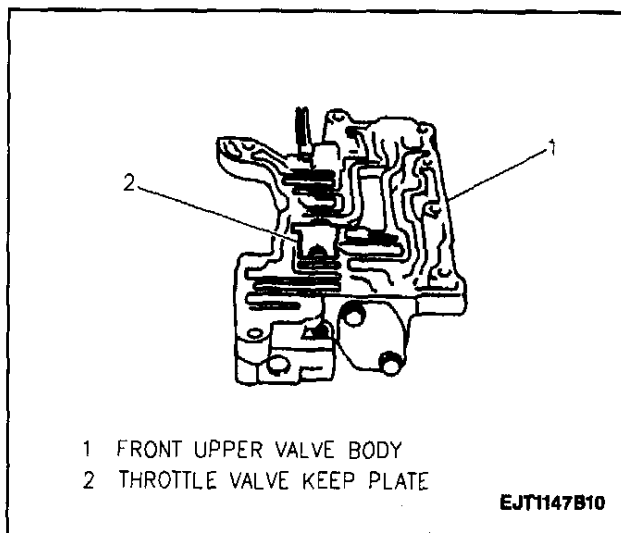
Removing Throttle Valve Keep Plate (03-72LE, 4-Speed)
